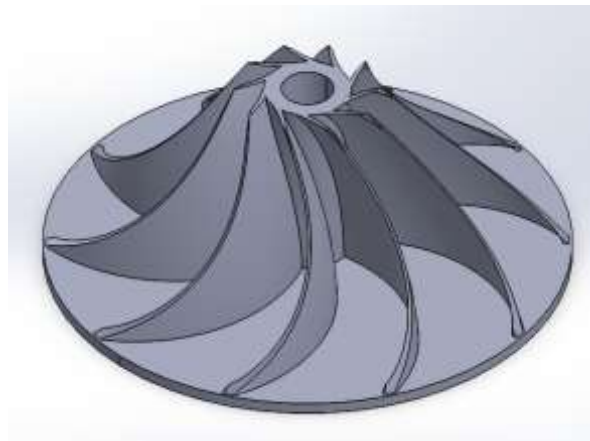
(a): CAD Model — Blade Outlet Angle 45°
